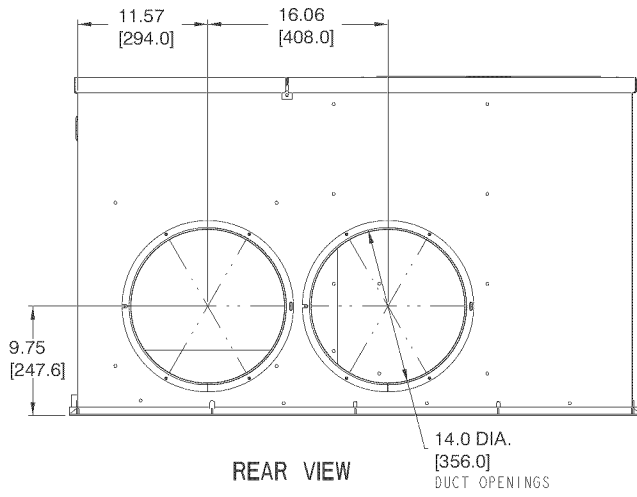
Base Unit Dimensions, 50ZP024-036
